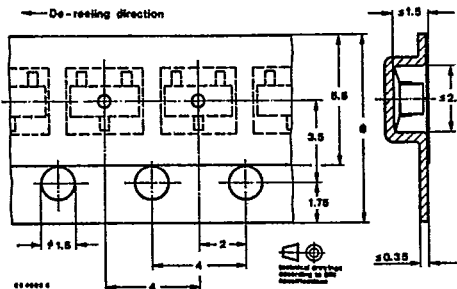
Tape dimensions for SOT 23 and SOT 143 in mm
